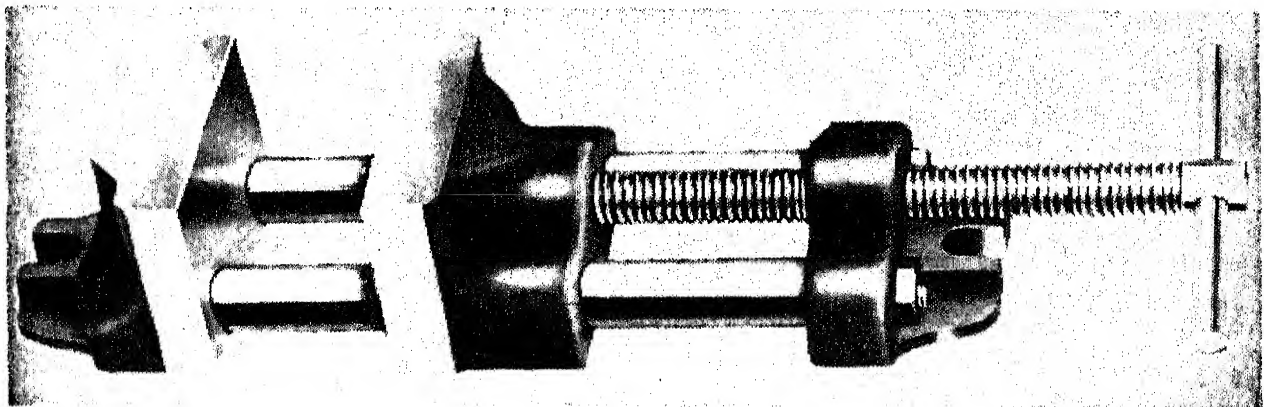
A typical drill vise. (Courtesy Atlas Press Co.)
